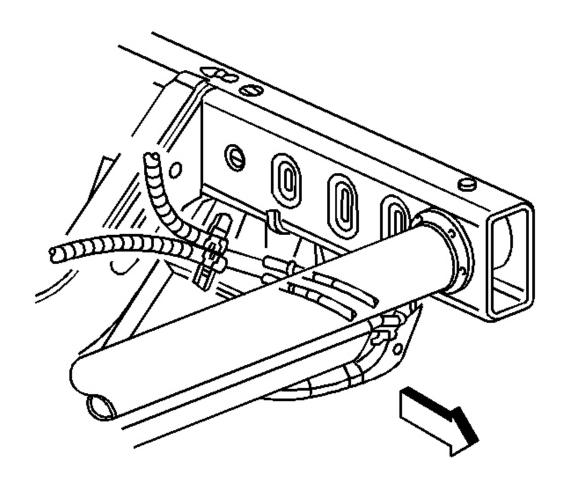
View Of Power Steering Hose Assembly At Power Steering Cooler Courtesy of GENERAL MOTORS CORP.
